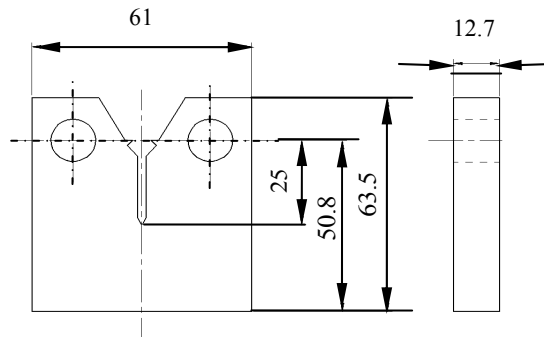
Shapes and dimensions of the fracture toughness test specimen.
